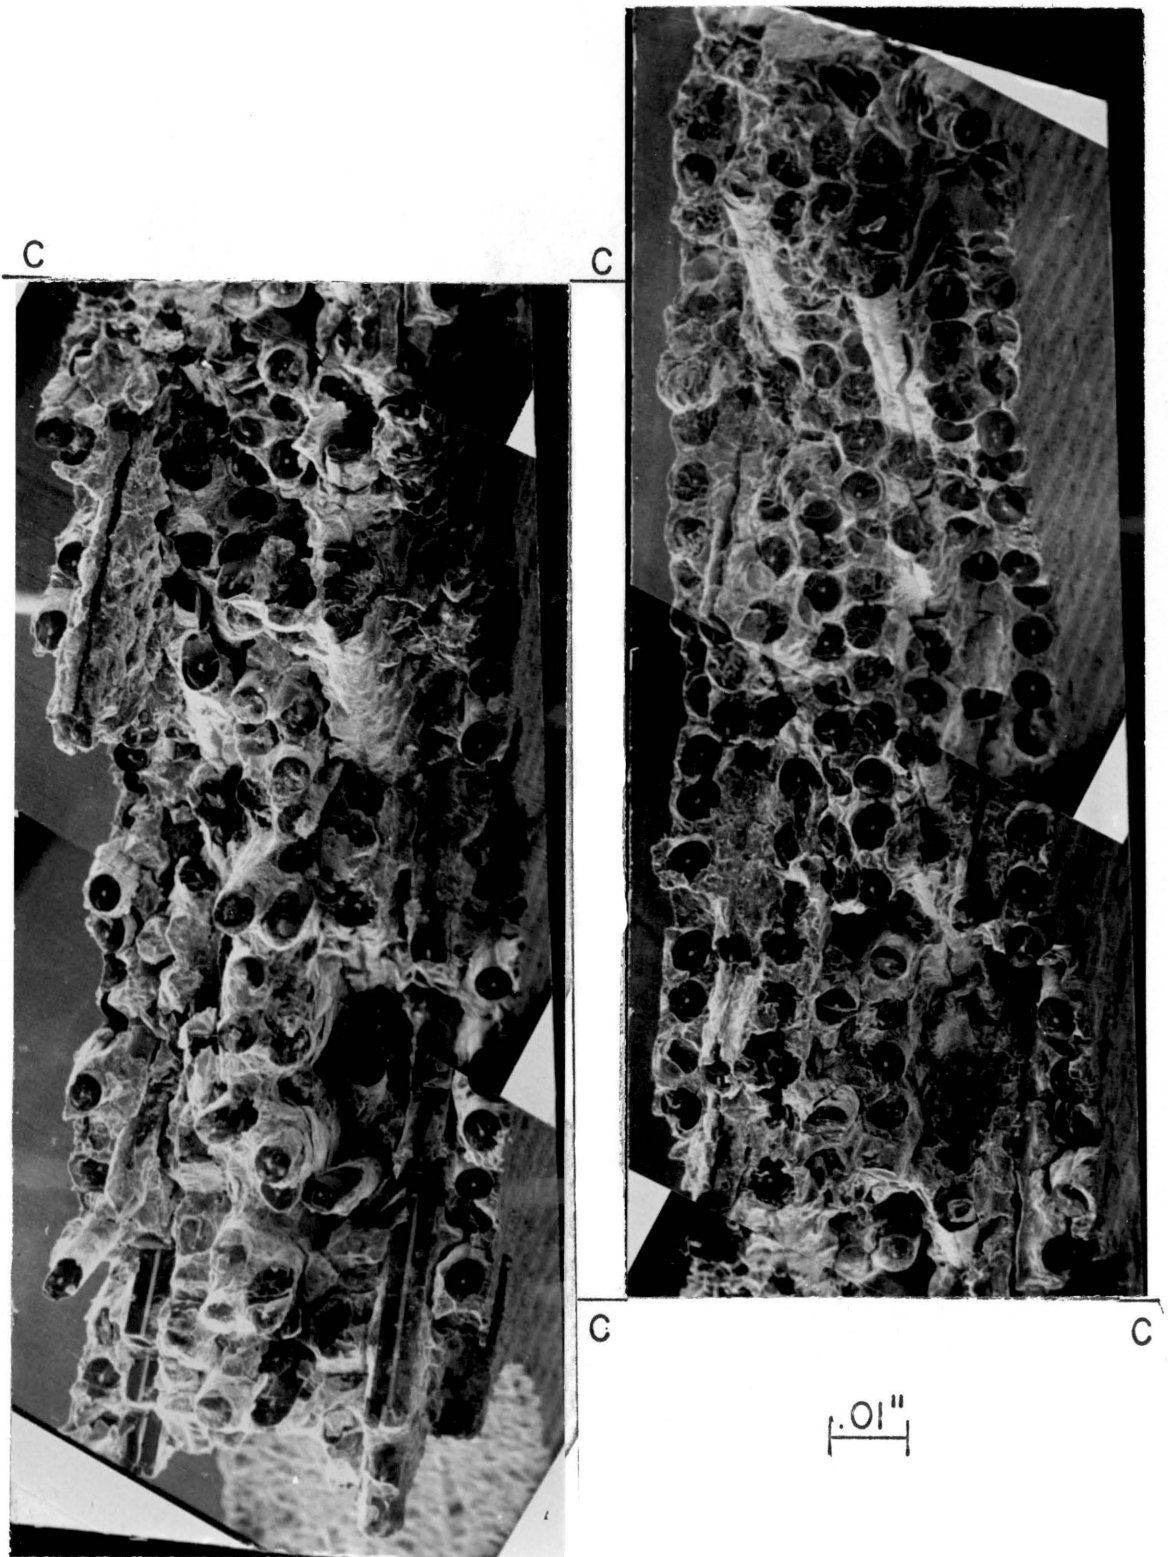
B/A1 Ib 45Hz fatigue fracture surface.
